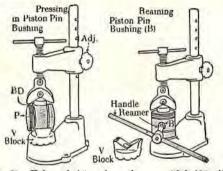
Universal piston vise and press, with babbitt lined jaws designed especially for removing piston pins and bushings.
